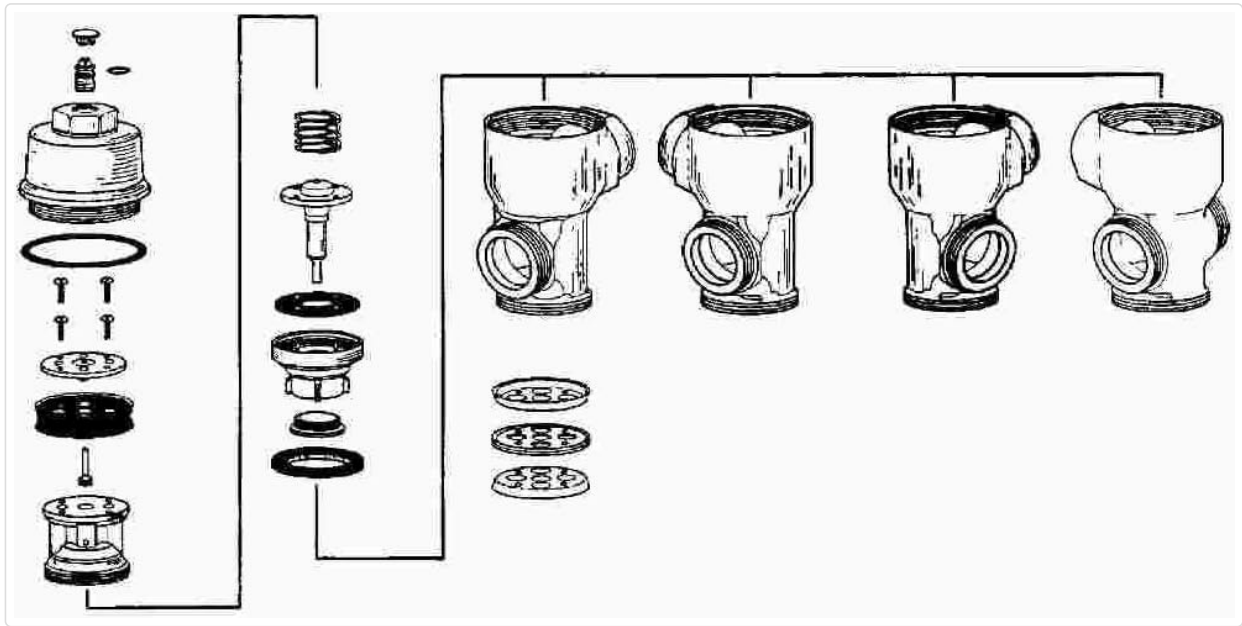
Exploded view diagram illustrating various flush valve components. This diagram provides a visual guide to the internal parts of a flush valve, including the piston assembly, and aids in understanding their arrangement during installation or repair.
